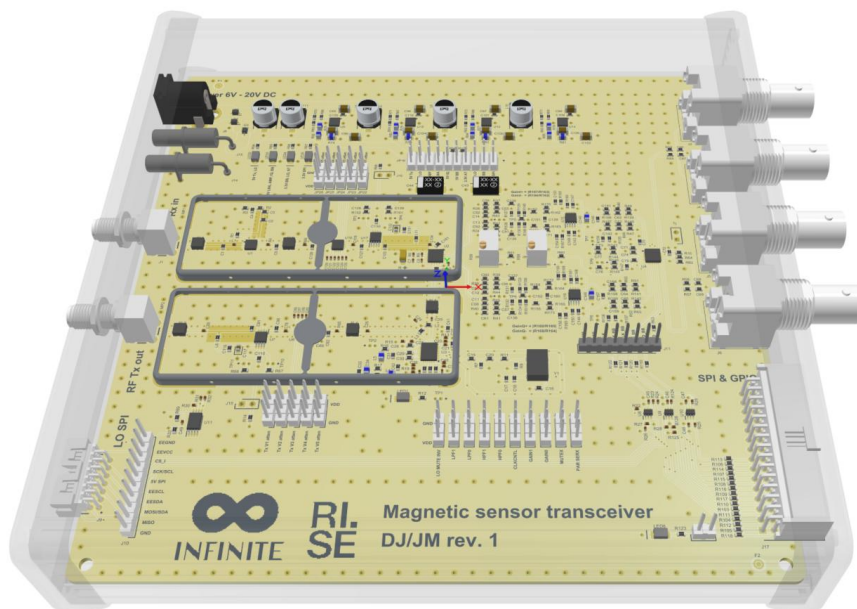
3D picture of the transceiver PCB mounted in a shielding box.
